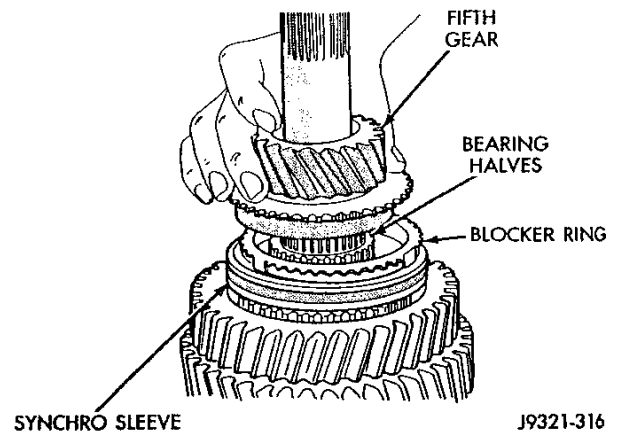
Fifth Gear, Bearings And Blocker Ring Installation
